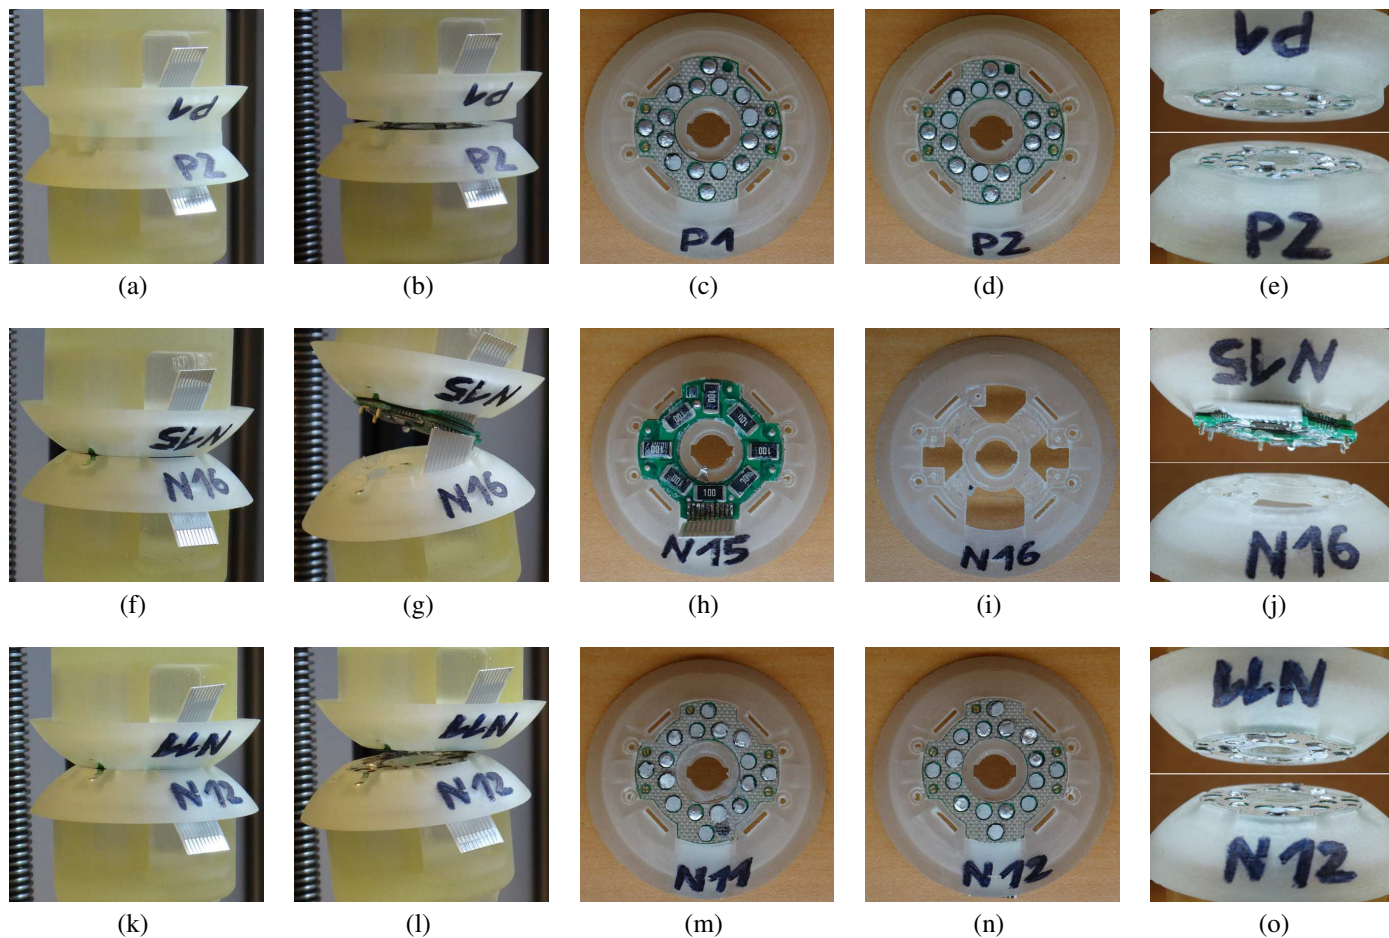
Photographs of failure modes observed during tensile tests of pairs of soldered connectors. (a)-(e) Only 5 out of 16 connector pads show a fracture surface suggesting an incomplete connection was formed. (f)-(j) One connector was pulled out of the cube shell. (k)-(o) All 16 connector pads show fracture surface suggesting a complete connection was formed.
